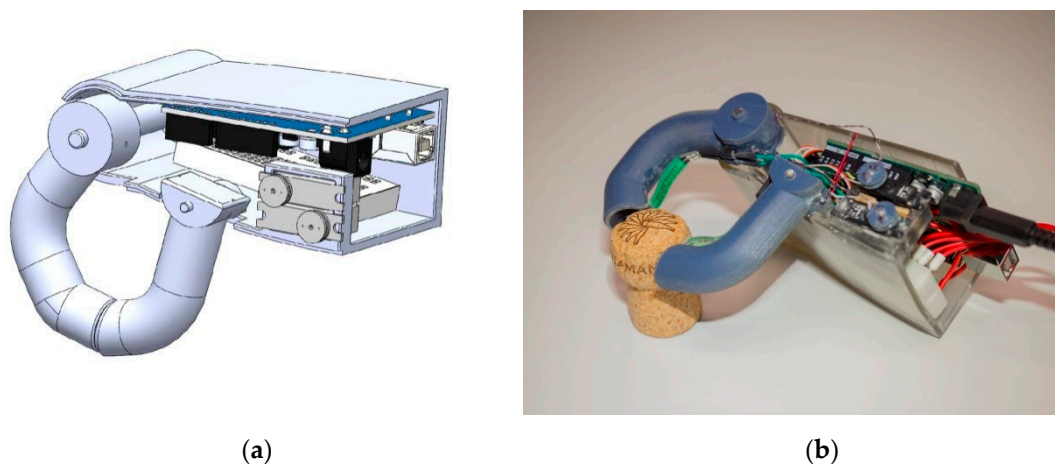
Conversion of the Götz hand to a sensorimotor, controller-controlled intelligent finger system. (a) 3D CAD reconstruction; (b) view after removal of the lateral chassis cover with insight into the electronics and servo motors. For further details on the hardware and software, please refer to [14].
